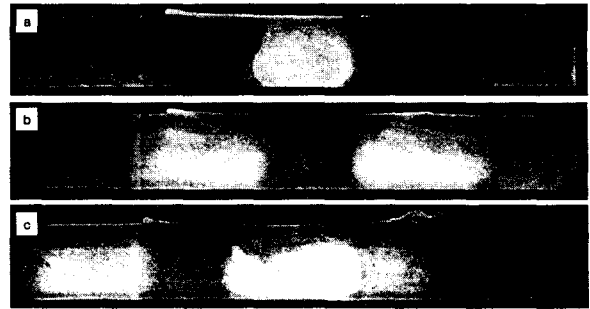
Macro image near the weld zone of FSWed 2219 Al a) 800rpm, b) 1250rpm, c) 1600rpm
